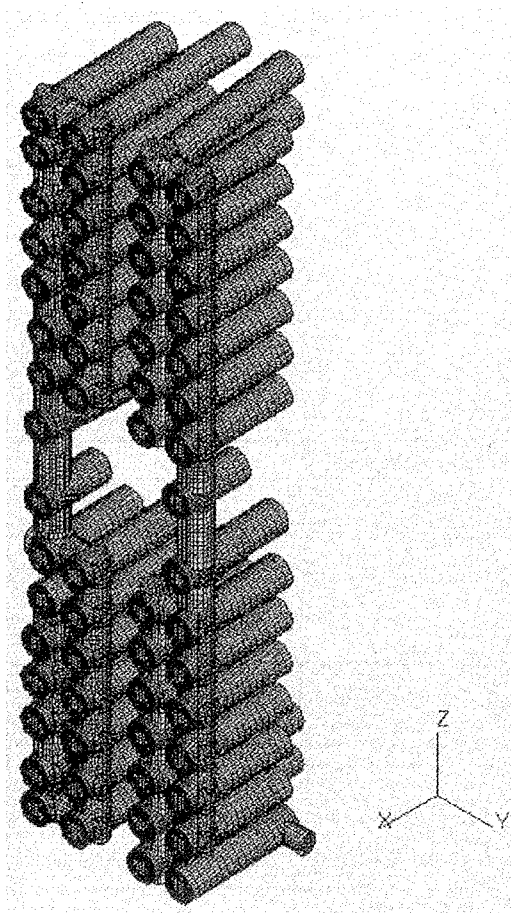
Isometric view of coolant channels (module center side)
